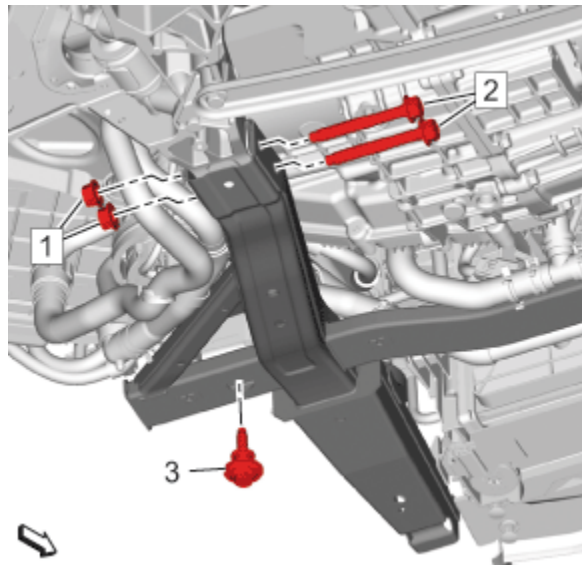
Drivetrain And Front Suspension Crossmember Extension Fasteners
